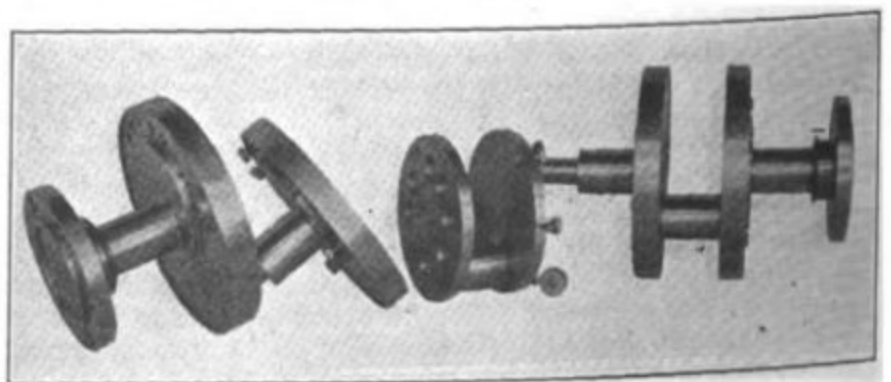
THE BUILT-UP CRANKSHAFT CONSTRUCTION
